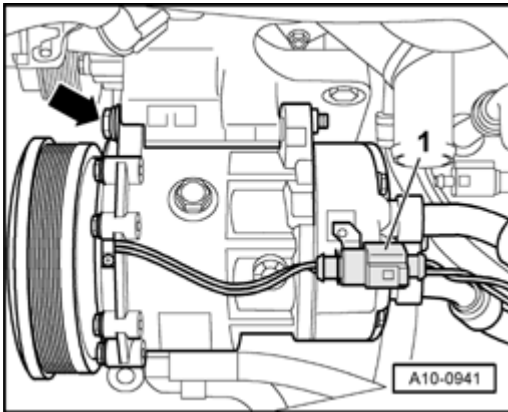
Disconnecting Electrical Connector For Magnetic Clutch Of Air Conditioning Compressor
